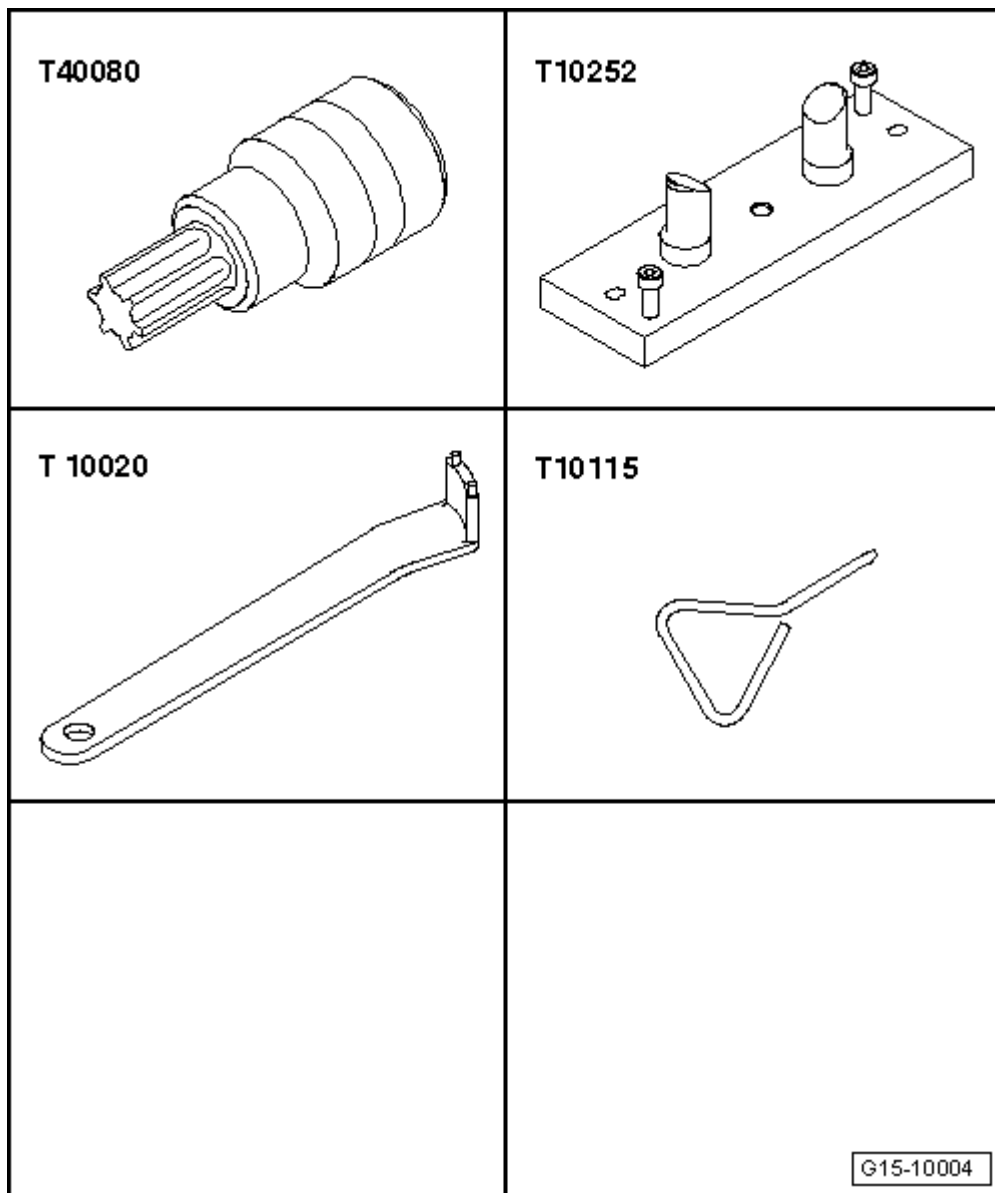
Identifying Special Tools -- Camshaft Adjuster, Removing And Installing
